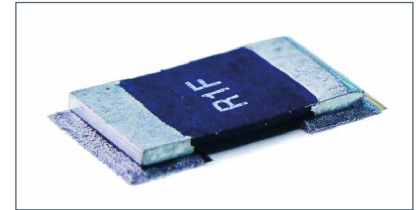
Surface-mounted component shown before the solder in the solder paste melts [31]
